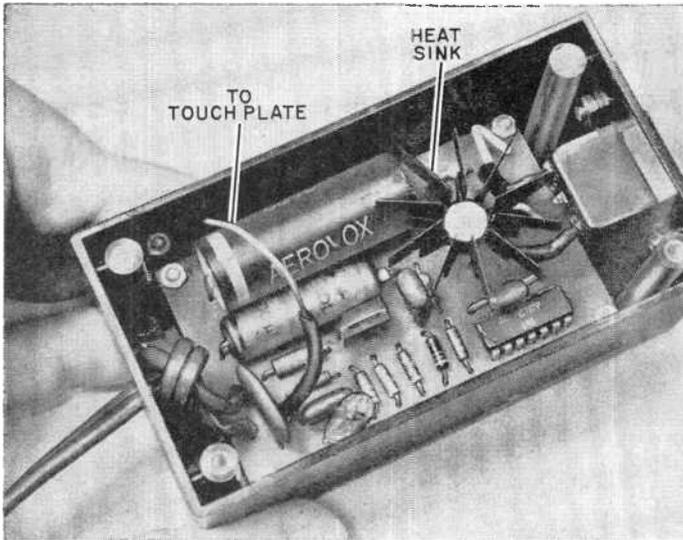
Heat sink slips onto Q1's case; bare wire end goes to cabinet's metal cover plate.
